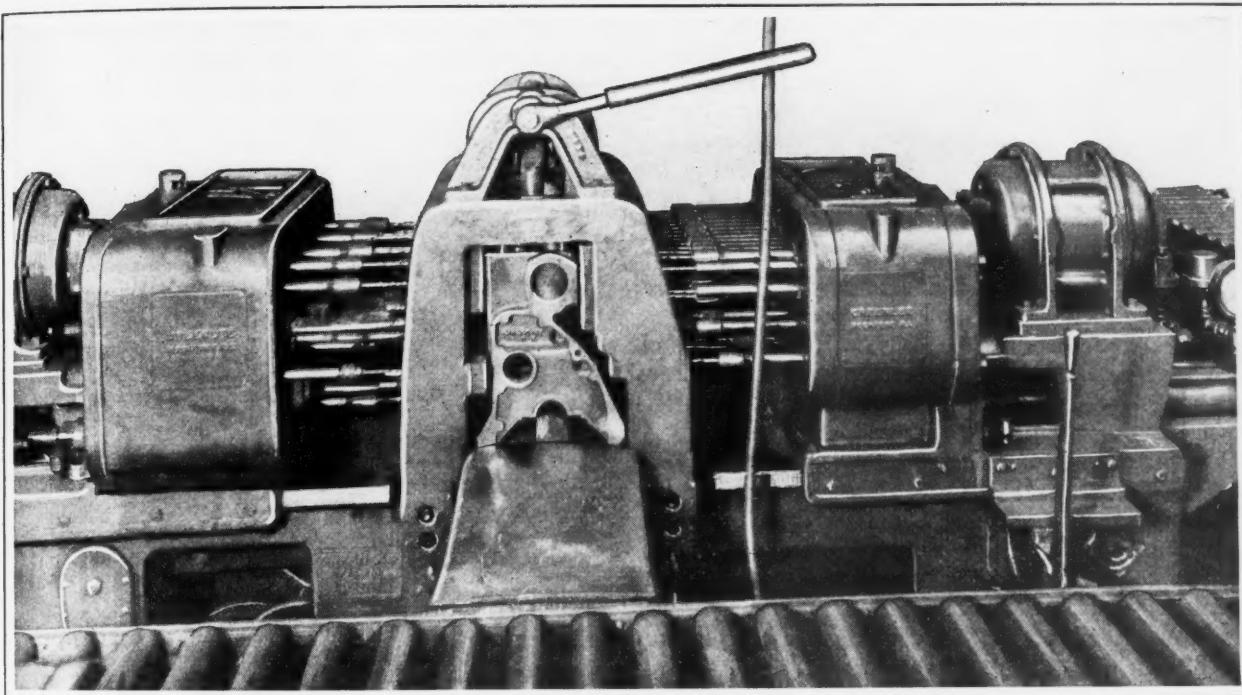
One of a Battery of Horizontal Multiple-spindle Drilling and Tapping Machines
